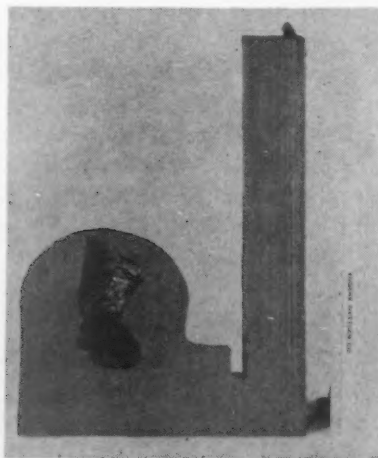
CASTING MADE WITH A CHOKE CORE AT THE NECK.
